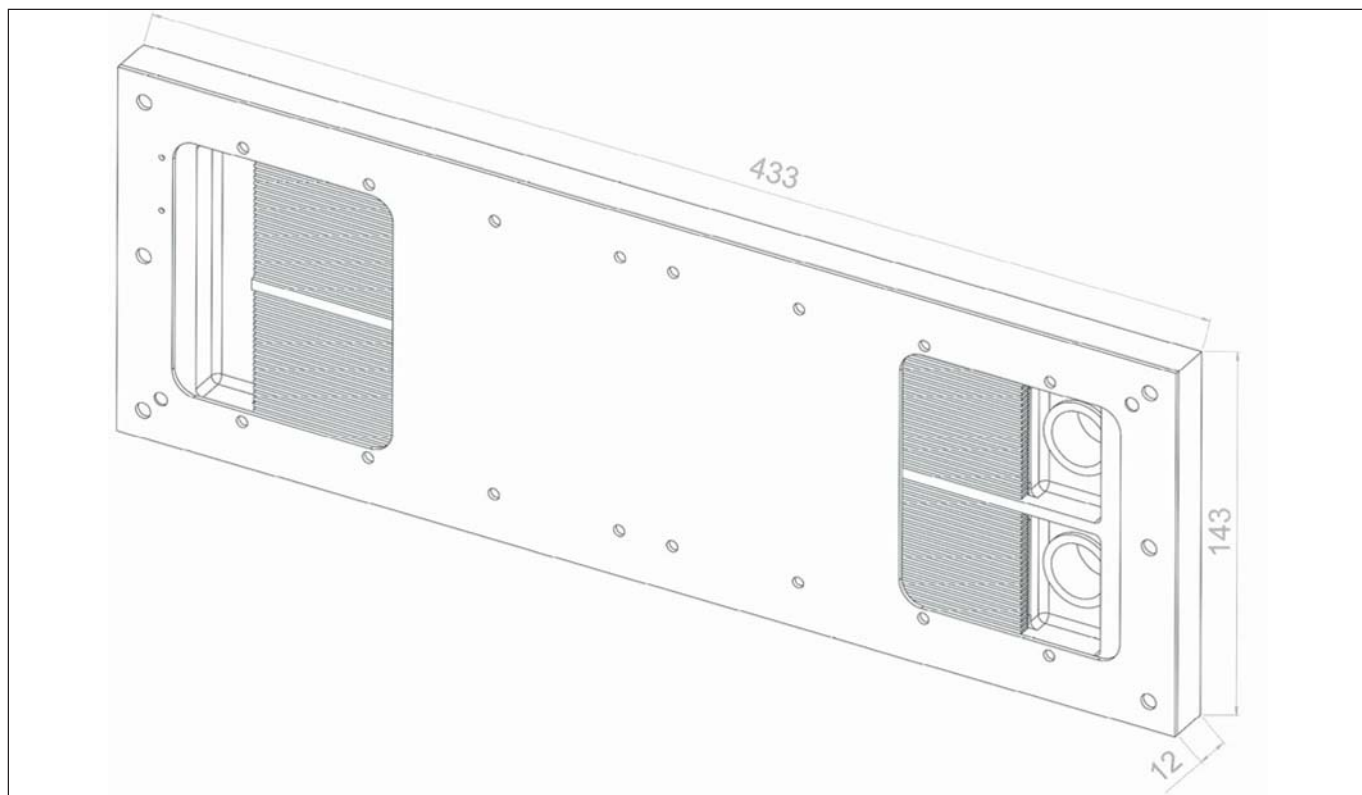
An experienced vacuum-brazed cold plate designer can quickly identify jobs that would benefit from using clad aluminum, rather than the conventional braze foil. (Pictured here is a CAD design of a cold plate completed.)
